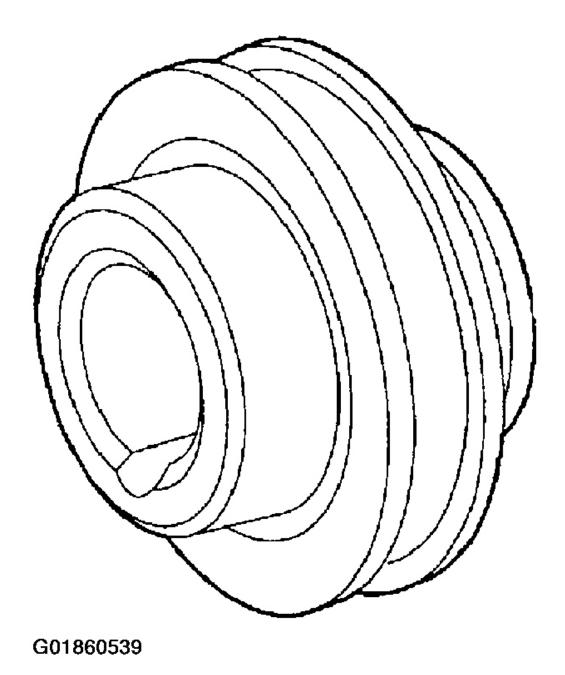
Identifying Insertion Tool 9103 Courtesy of DAIMLERCHRYSLER CORP.
